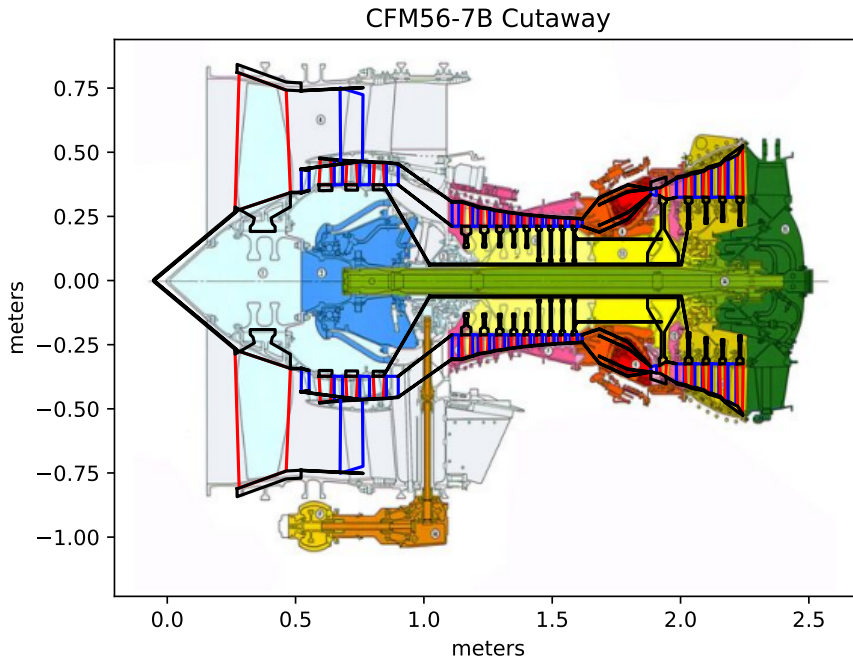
Comparison of the cutaway drawing produced with WEST with the cutaway drawing of the CFM56-7B engine.
